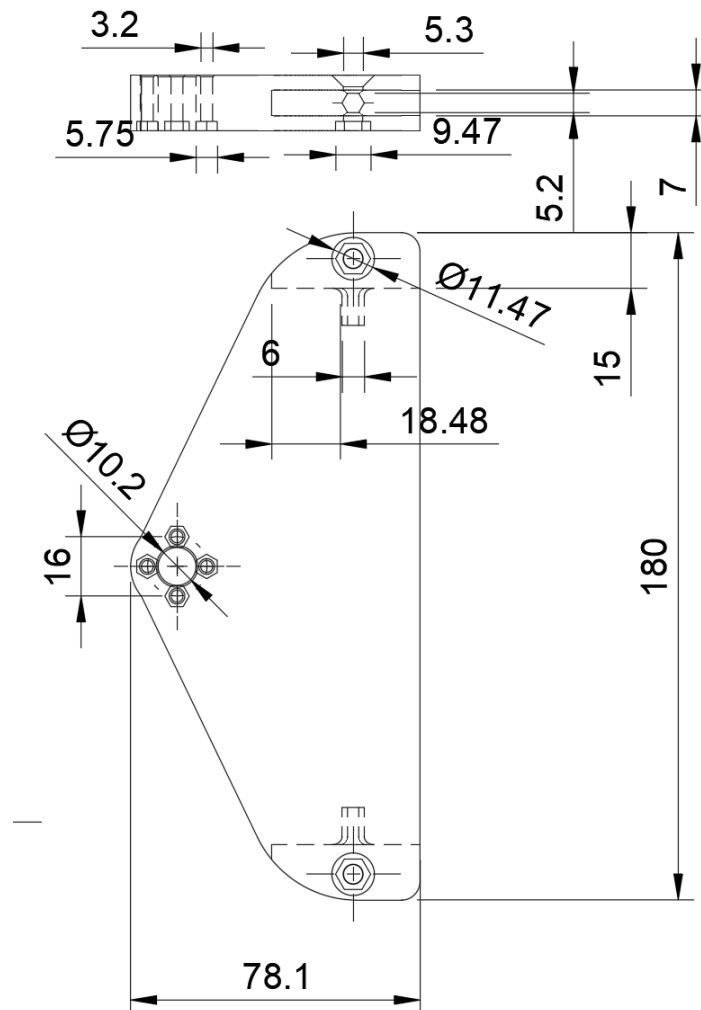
shows the base connector mount from the base to both side connectors and the non-backlash nut.
